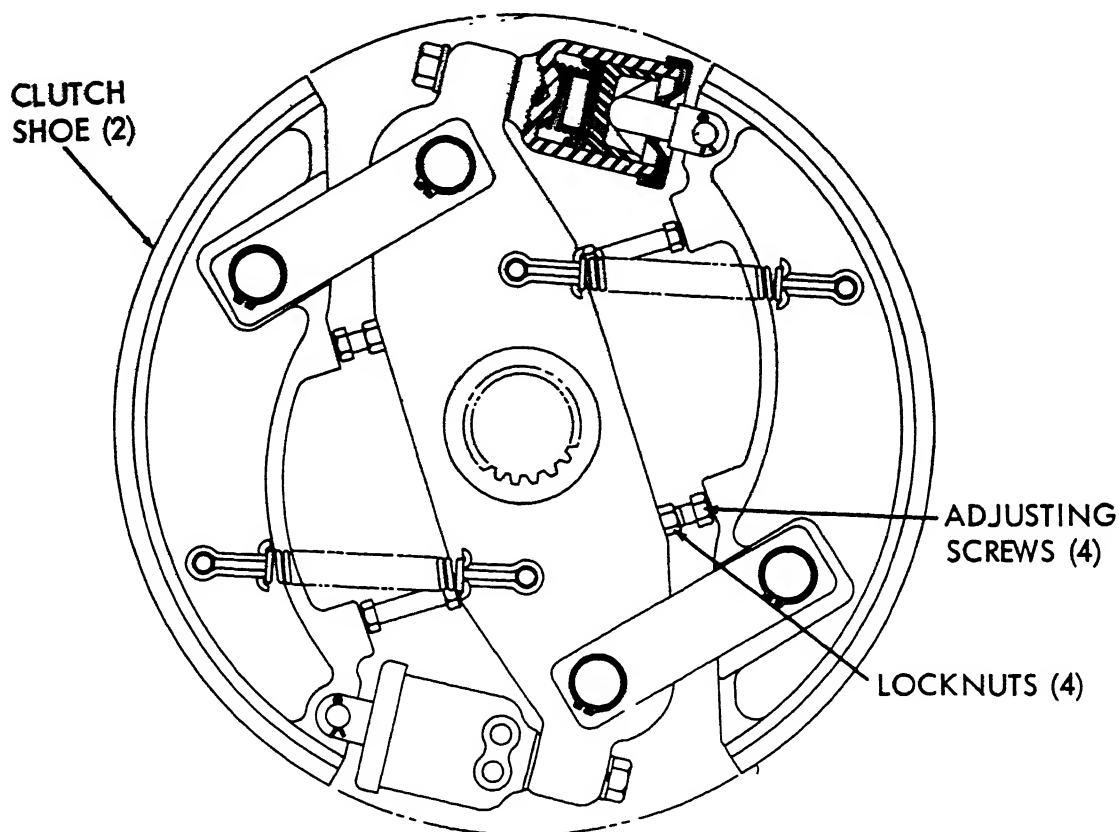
Rear drumshaft clutch band, removal and replacement.
